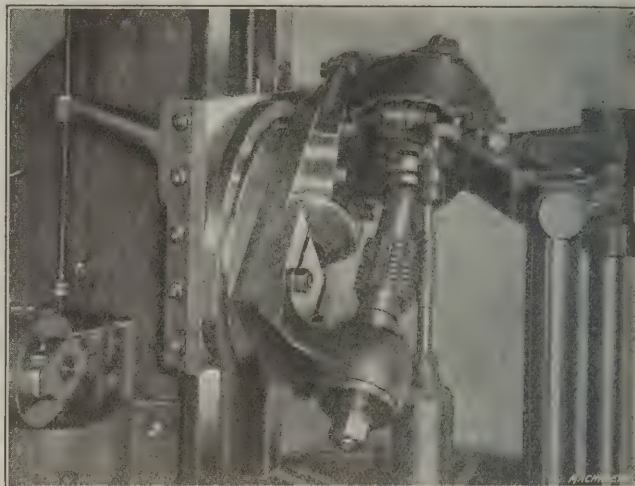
Hobbing Small Five-threaded Worm on Gear-hobbing Machine
